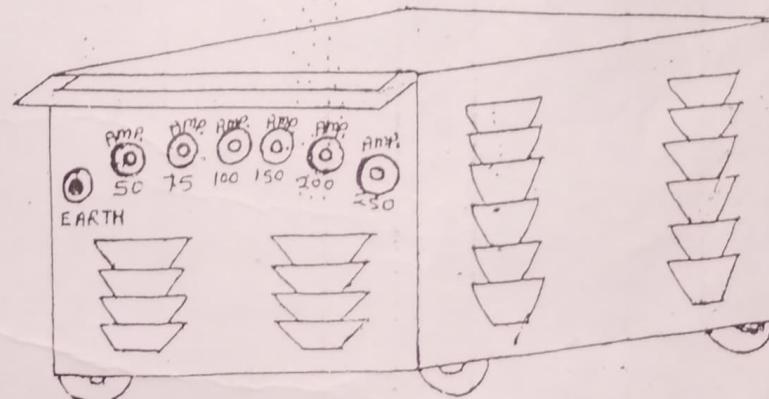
FIGURE : A.C. WELDING TRANSFORMER (AIR COOLED)
